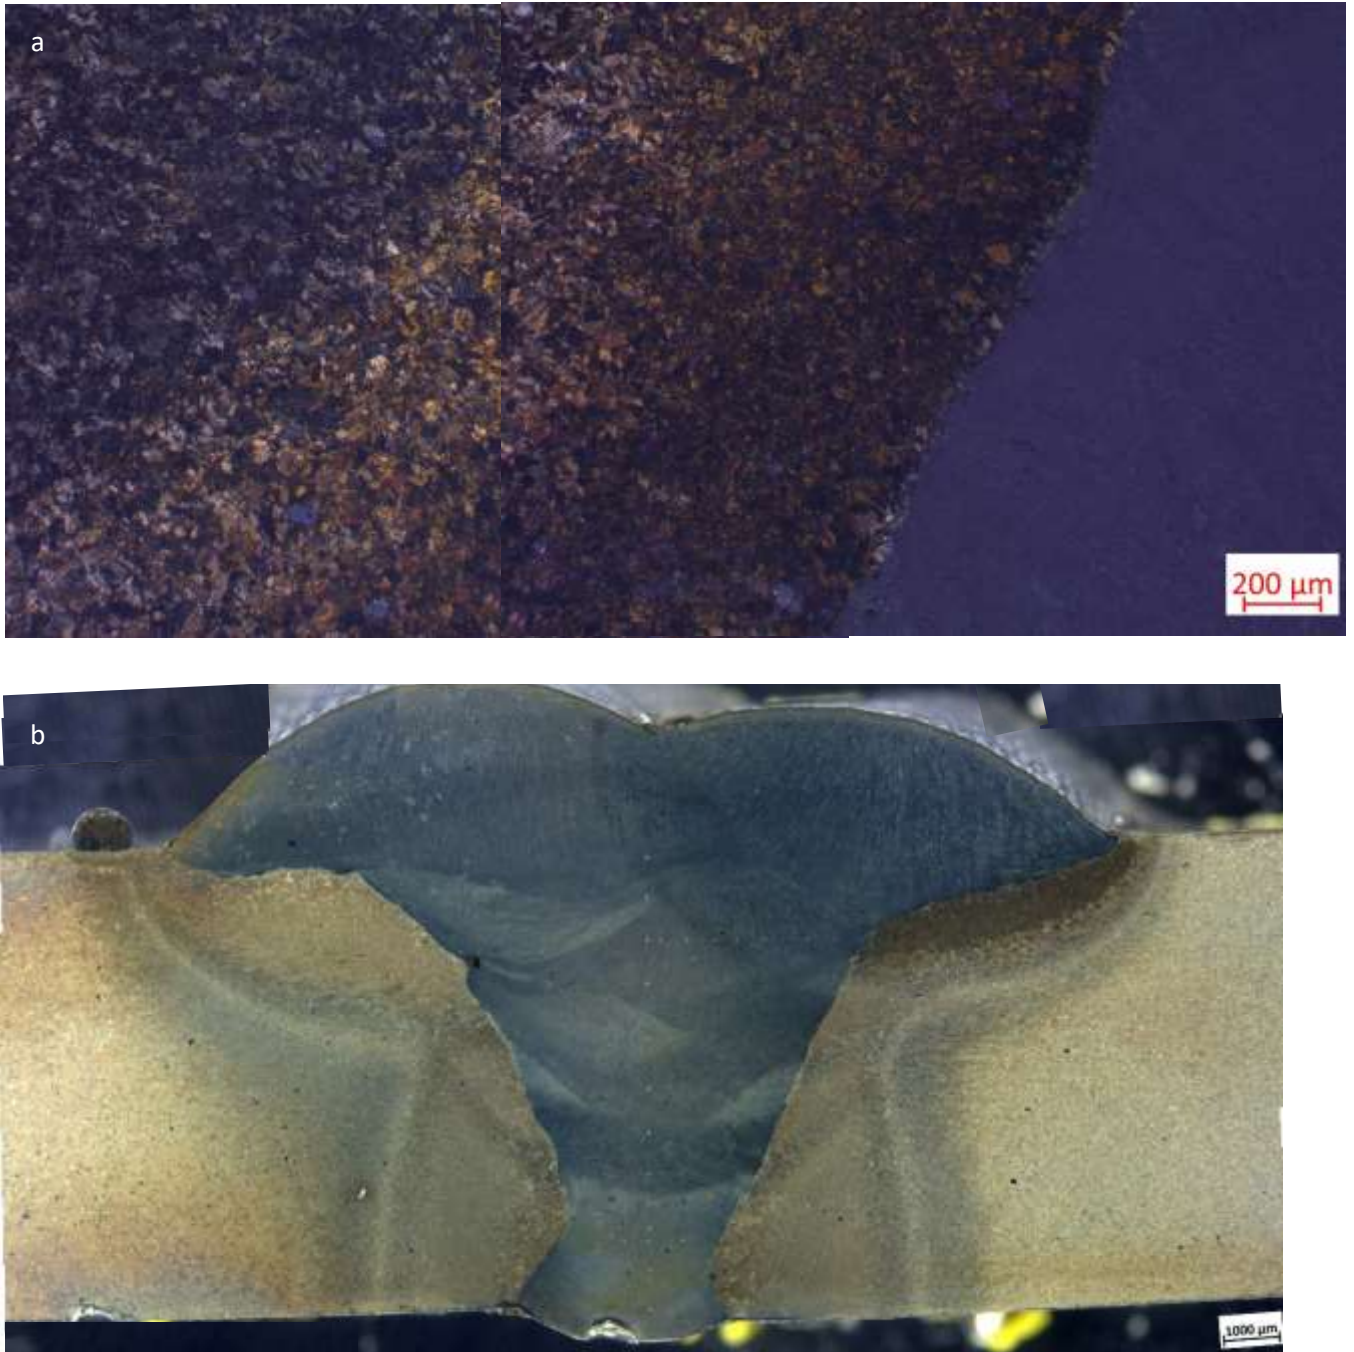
Optical microscope picture of heat affected zone (a), picture of welded section of MIGT sample (b)
